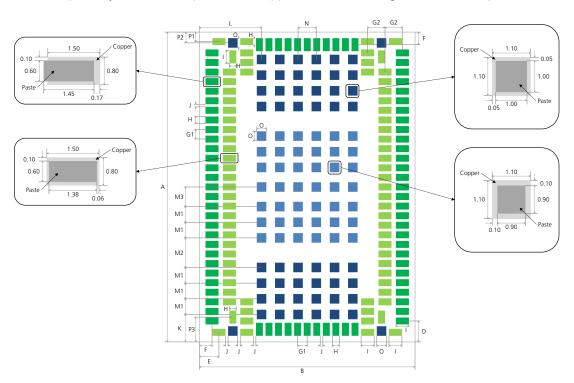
Suggested footprint and stencil design for TOBY-L4 series modules, to be implemented on application PCB (top view)
